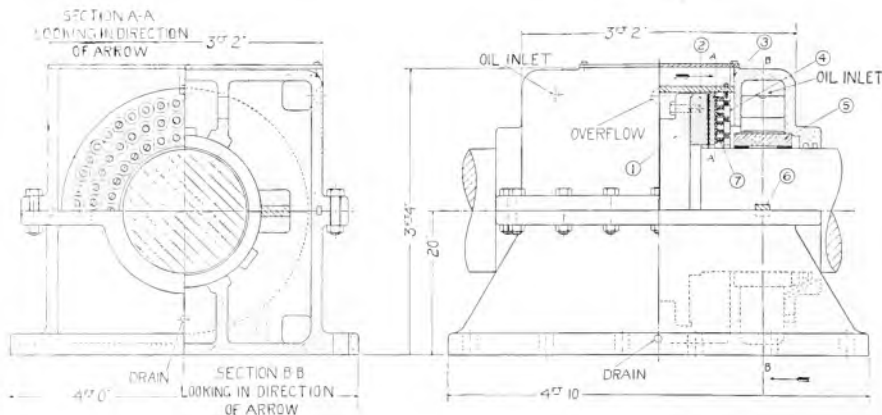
General Electric Spring Thrust Bearing for 60,000 lb. Thrust. Located astern the engine on propeller shaft
